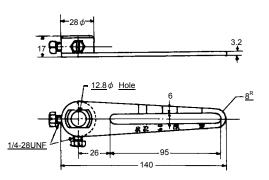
Dimensions (in mm) of damper arm (J-26026G-ARM)
